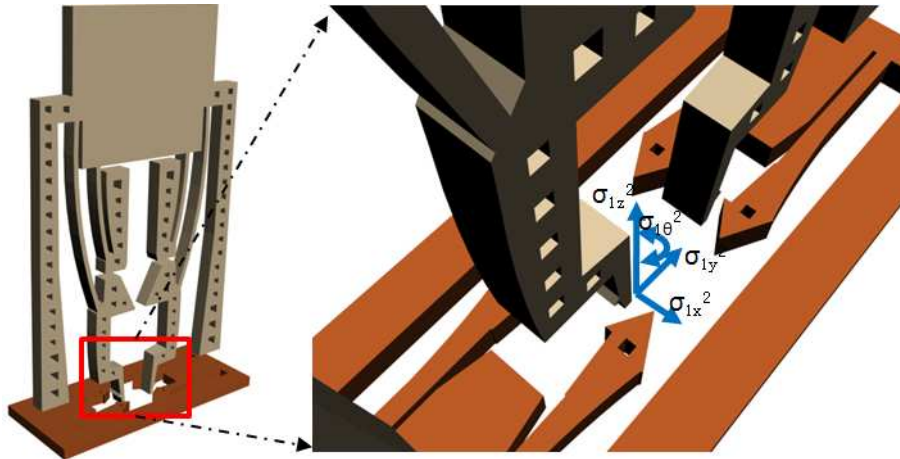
Design tolerance given to a MEMS part for assembly.
